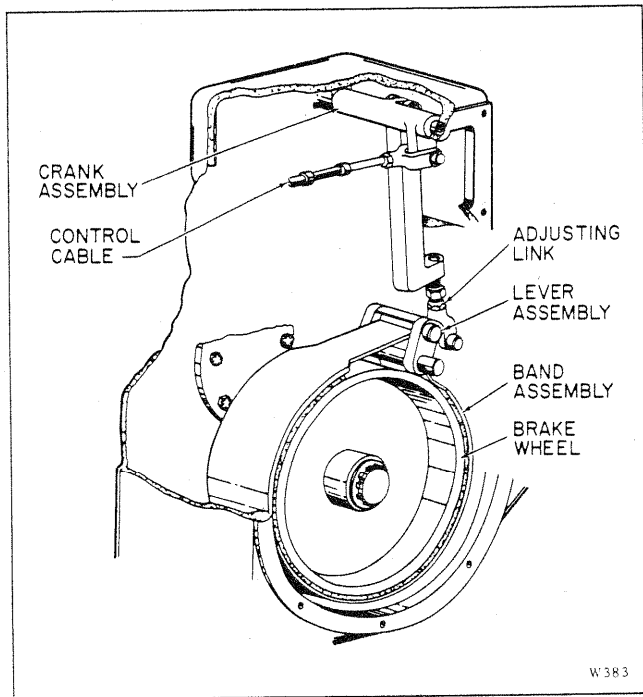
DRY BRAKE ASSEMBLY, DIRECT DRIVE WINCH
